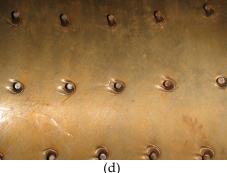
Usually flaws of spiral heat exchangers: a - overview; b - core removal; c -erosive corrosion of welded spacers ; d - detail erosive corrosion flaws.
